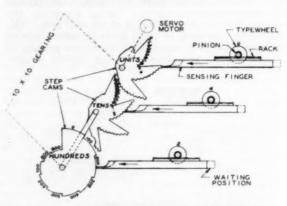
Step-cam and typewheel assembly with correlation, correlator disks, and step-over mechanism omitted
